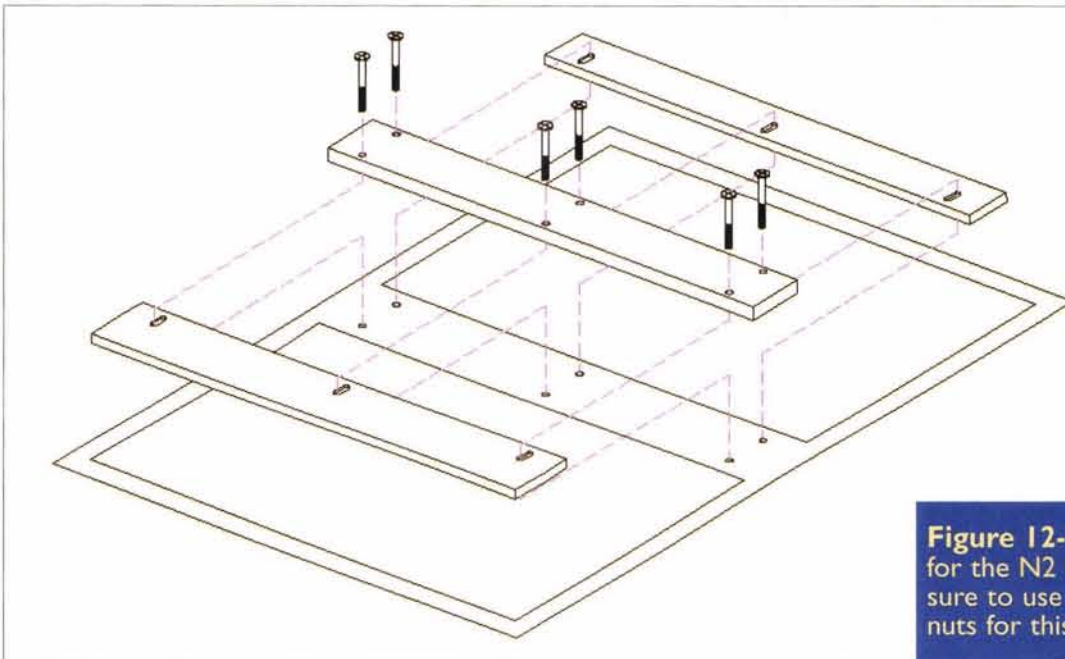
Assembly drawing for the N2 laser. Be absolutely sure to use nylon screws and nuts for this assembly.
